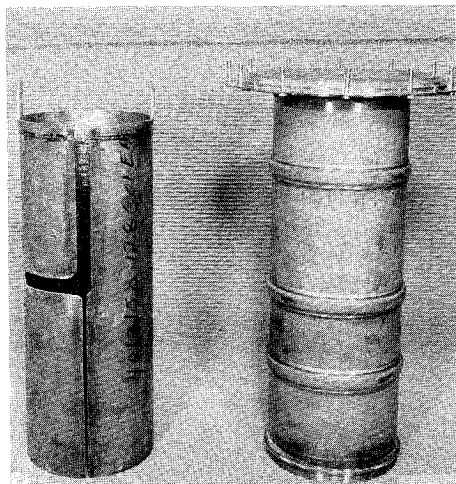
View of severed damping sleeve removed from rotating air tube.
